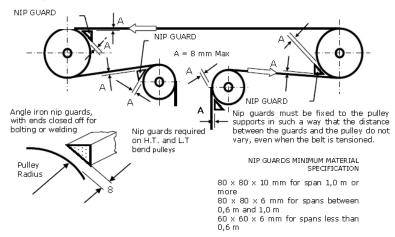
Typical Belt Conveyor Protection Installation Showing Nip Guards
